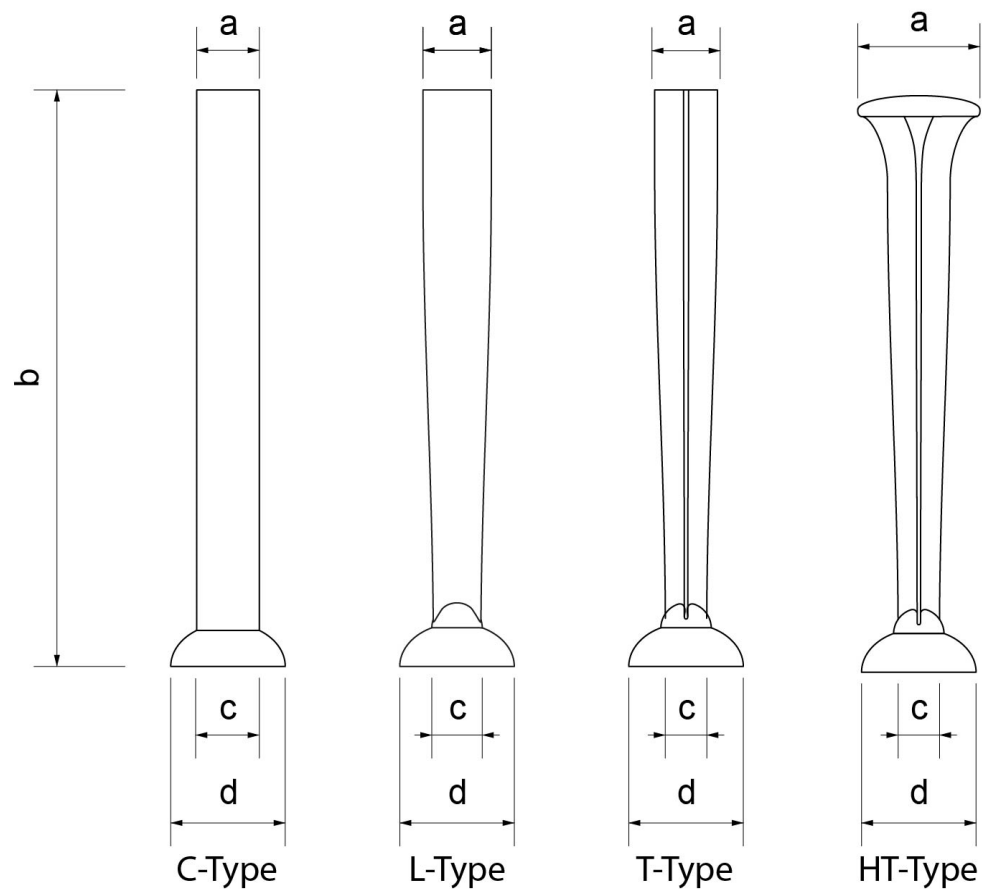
Model prototypes: technical drawing including definition of (a) upper width, (b) height, (c) lower width and (d) diameter of the base. Related dimensions are referenced in Table 1.
